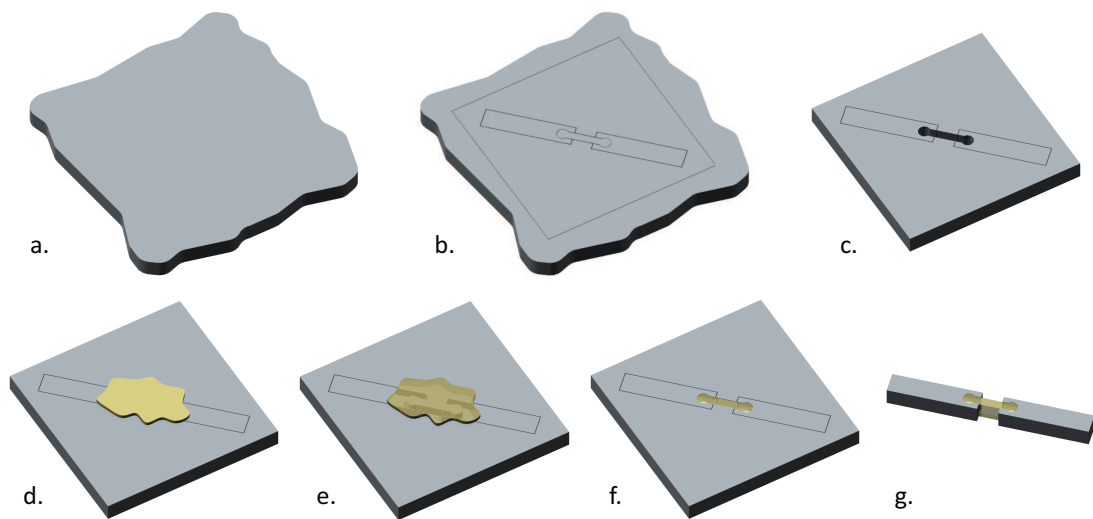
Process sequence for LaCER. (a) Rigid polymer sheet. (b) Laser cut design. (c) Remove hinge areas. (d) Pour hinge material. (e) Cure hinge material. (f) Planarize surface. (g) Release mechanism.
